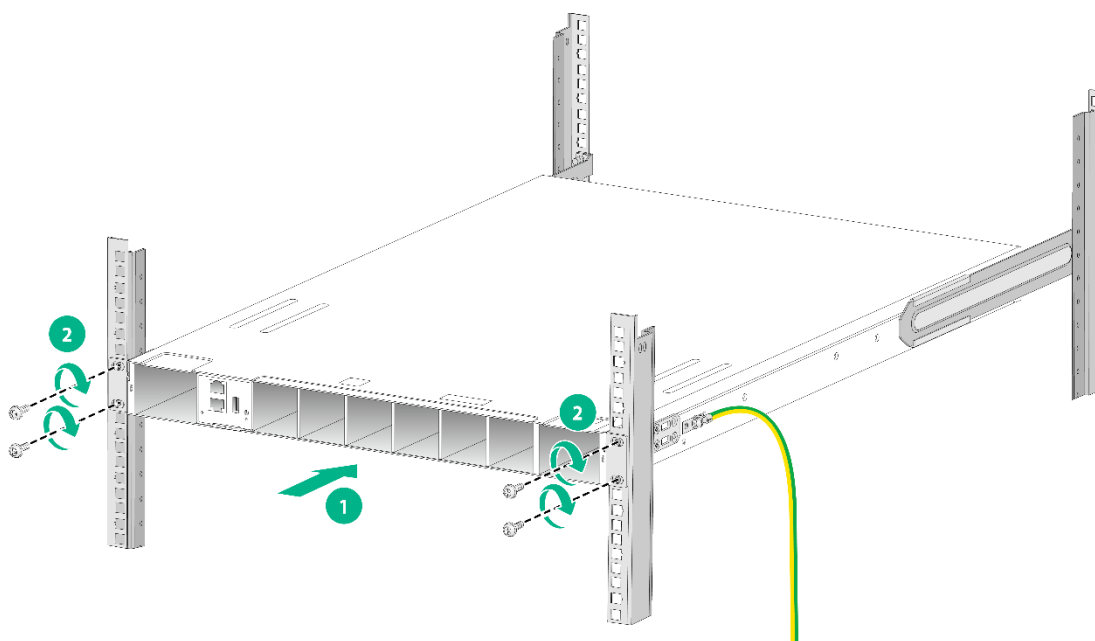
Mounting an S9855-40B switch in the rack (mounting brackets installed at the port side)
